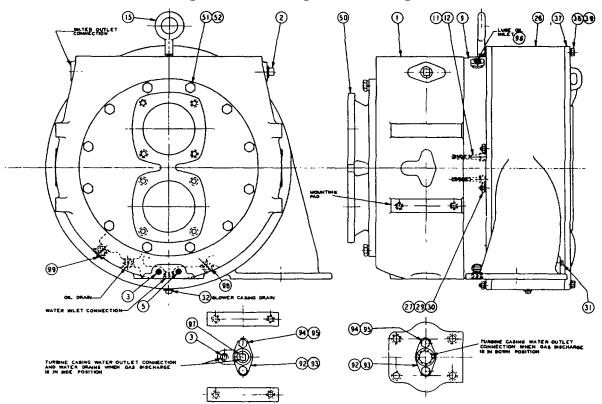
Outline Drawing L 20, L 40 and L 60 Turbocharger
